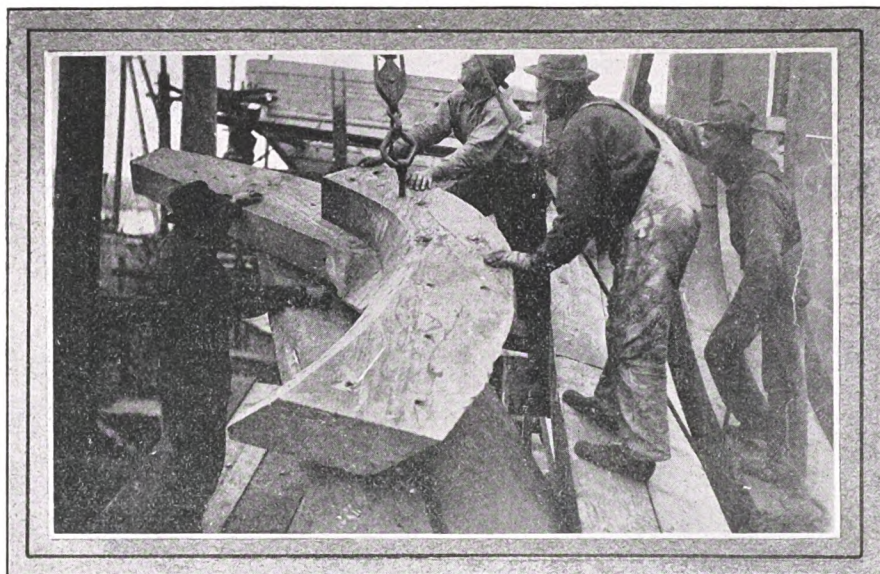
STERN FRAME ASSEMBLY BEING HOISTED INTO PLACE
